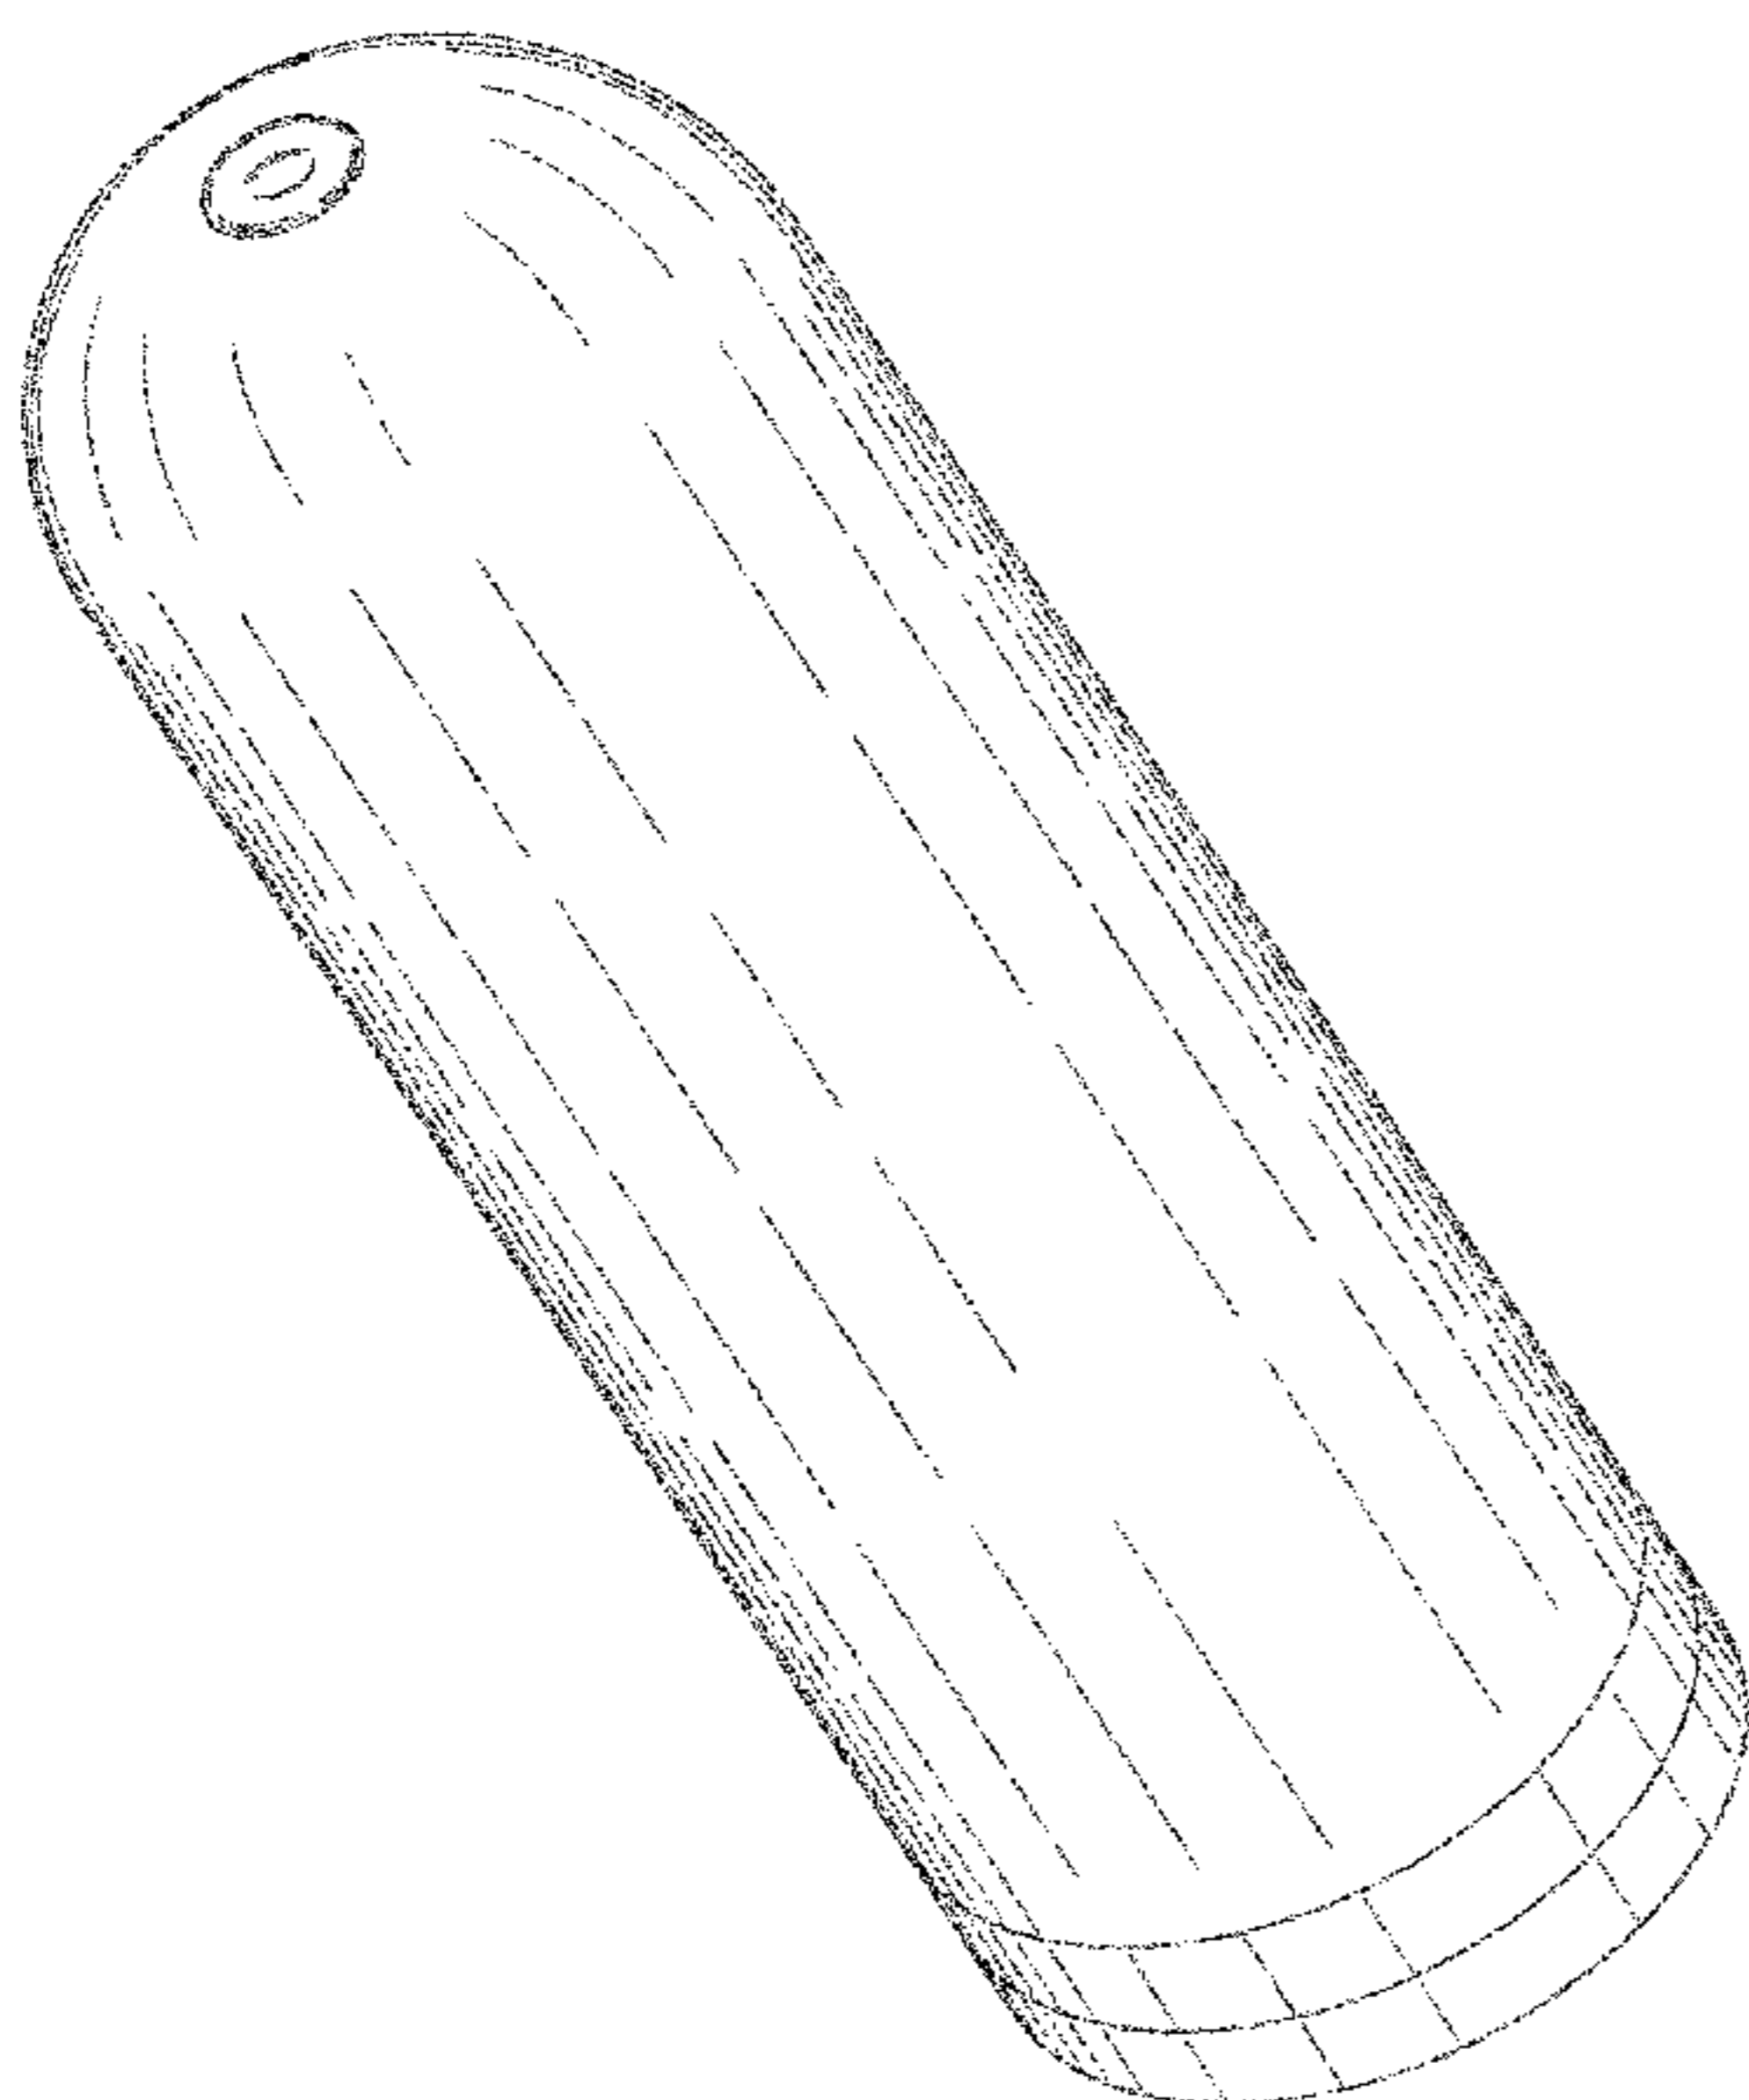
is a front, side perspective view of the squeezable bottle in the second configuration shown in FIG. 3;
